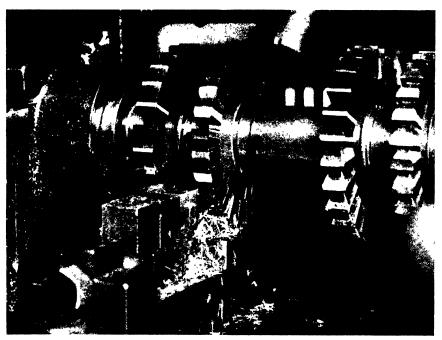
FIXTURE AT END OF BROWN & SHARPE AUTOMATIC MILLER TABLE
